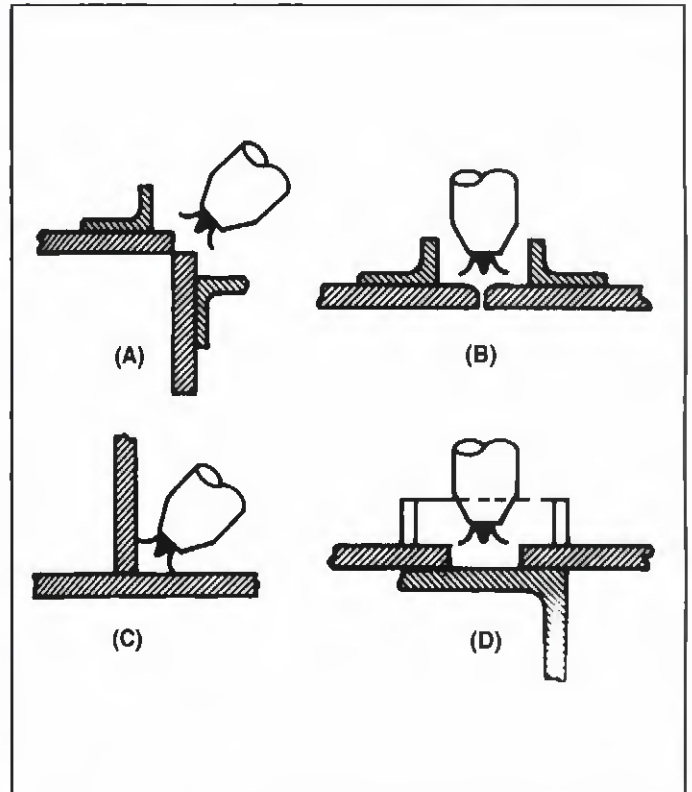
Examples of barriers used to contain the shielding gas near the joint.
